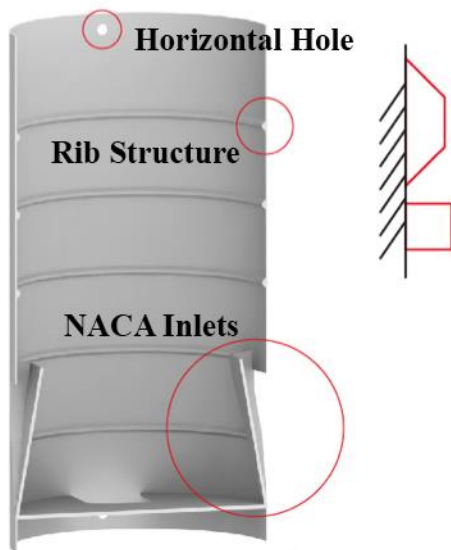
Left: photo rendering of fuselage cross section: from top to bottom, horizontal hole, internal rib, NACA duct. Right: self-supporting rib design and original rectangular rib profile requiring support.
